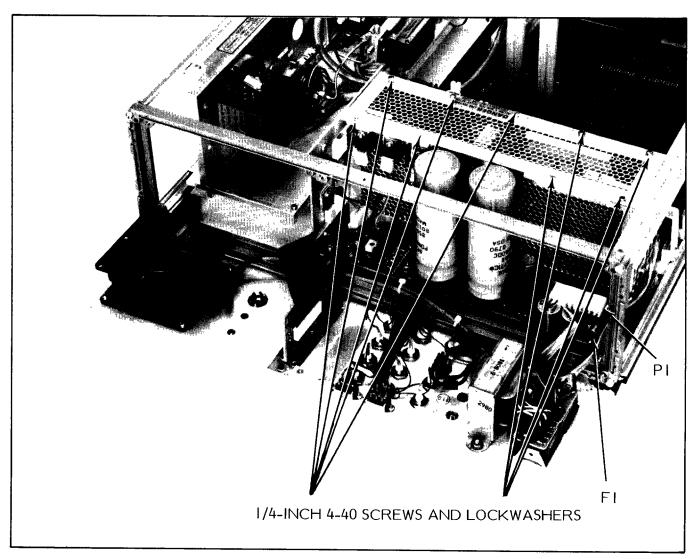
6600 Series Programmable Sweep Generator, Rear Quarter Panels and Assemblies
